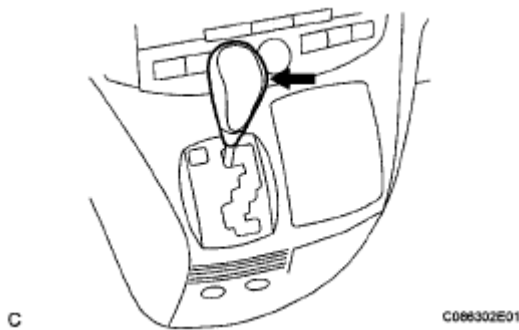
Locating Floor Shift Lever Knob Sub-Assembly
